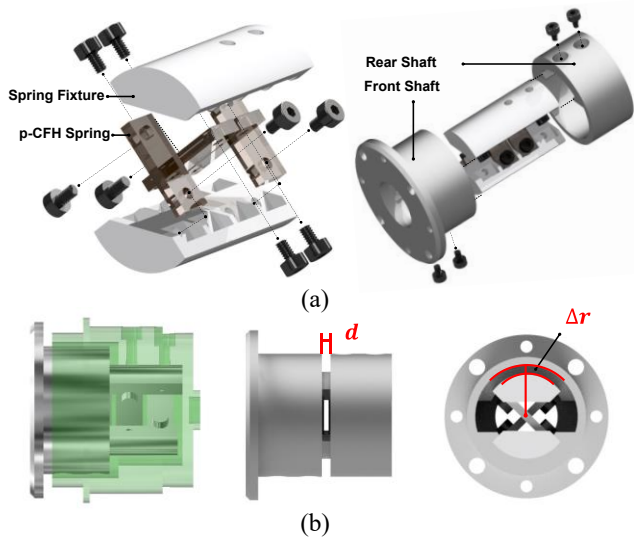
(a) Assembly process of p-CFH shaft. (b) p-CFH shaft workspace representation.
